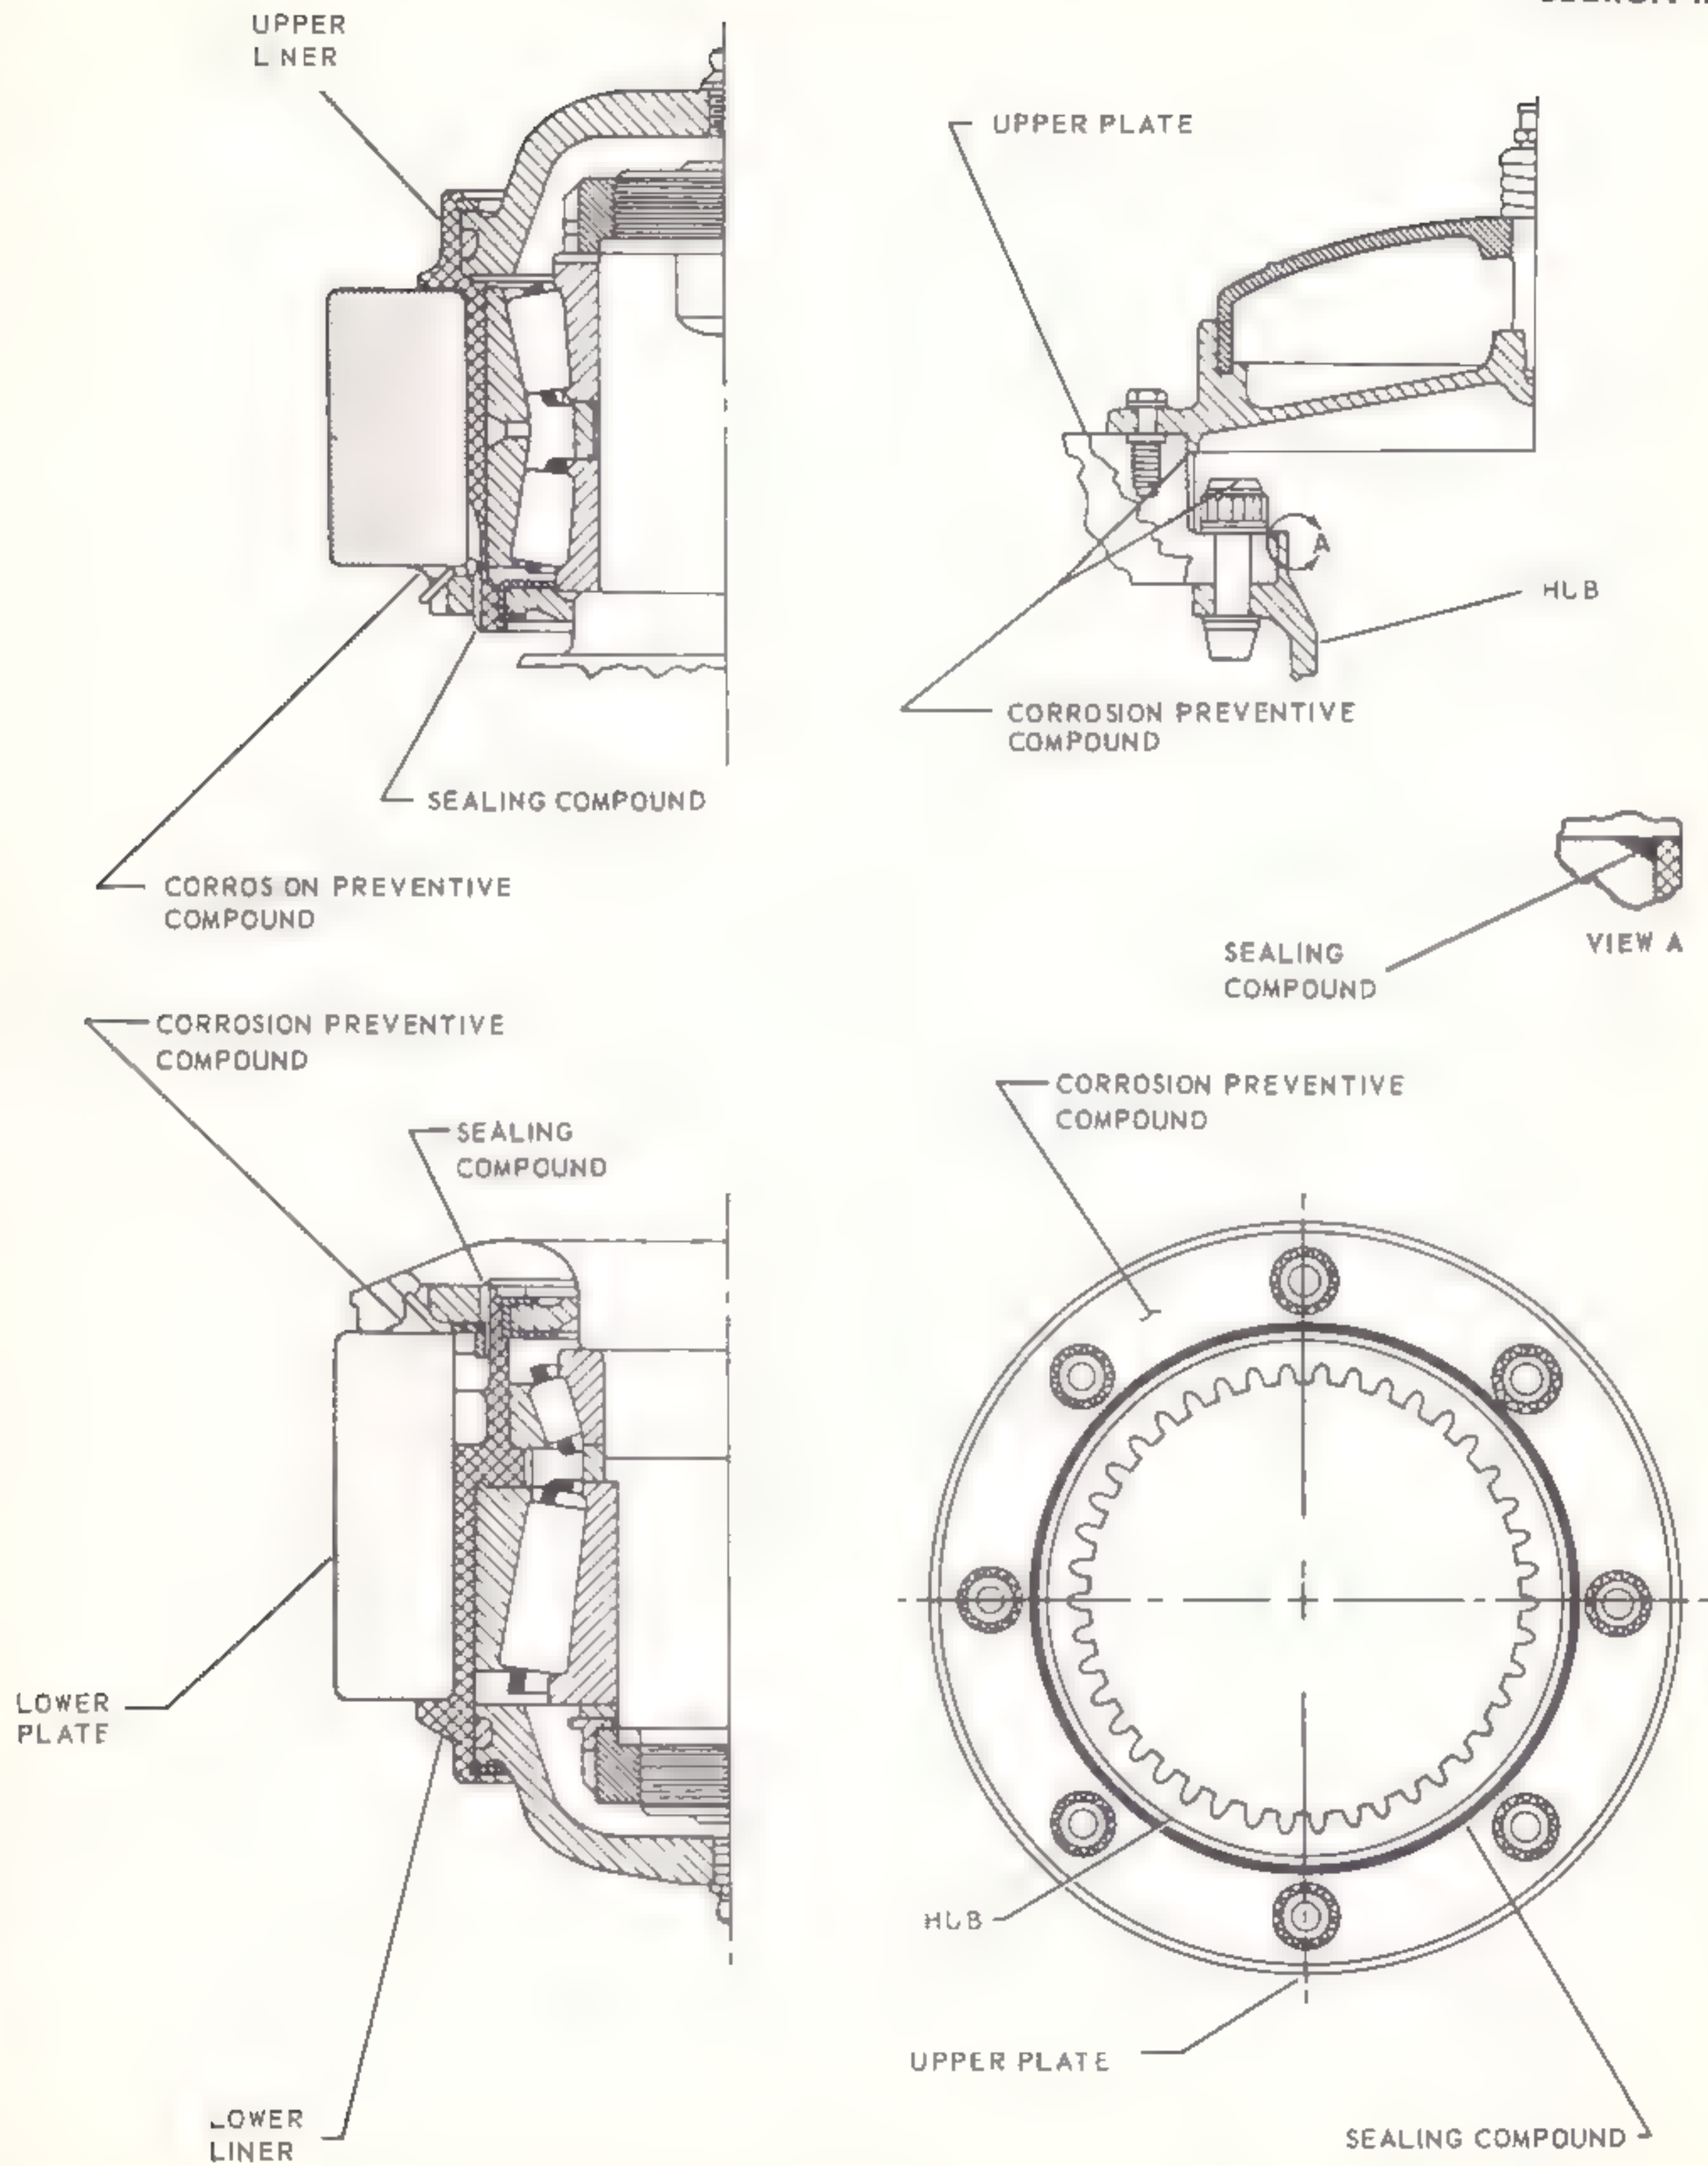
Corrosion-preventive measures — main rotor head assembly
